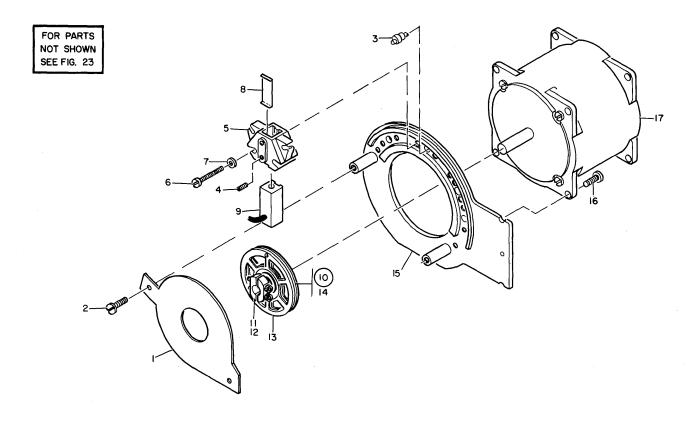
STEPPER MOTOR/TRANSDUCER ASSEMBLY.
